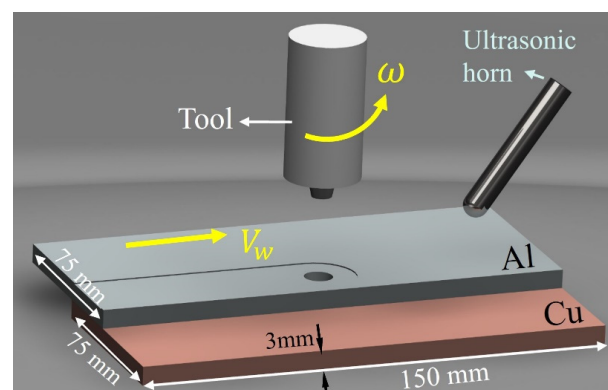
The schematic diagram of ultrasonic-assisted friction stir lap welding (UFSLW) process.
